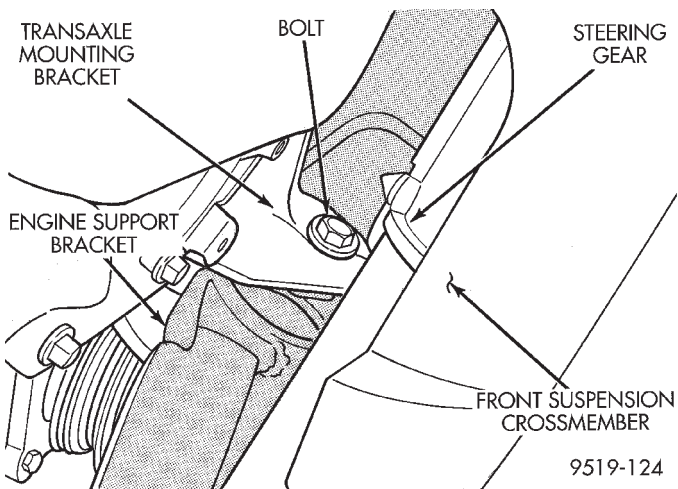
Engine Support Bracket To Transaxle Bracket Bolt
